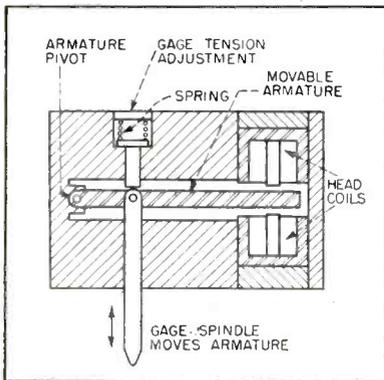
Electromagnetic gage head has two fixed coils and a movable armature attached to the gaging spindle
